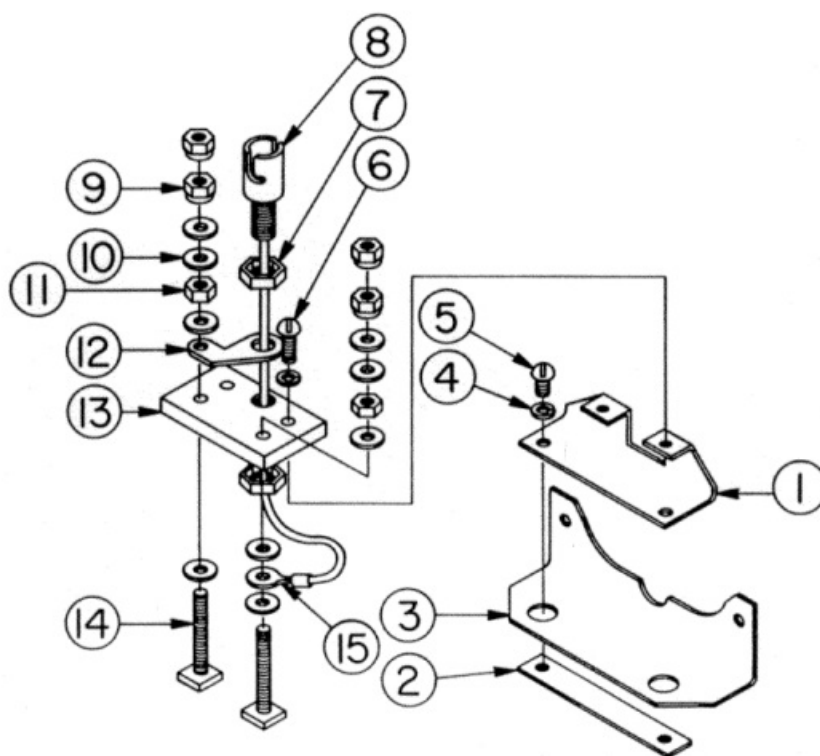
Lamp Support Bracket Replacement Parts Location
